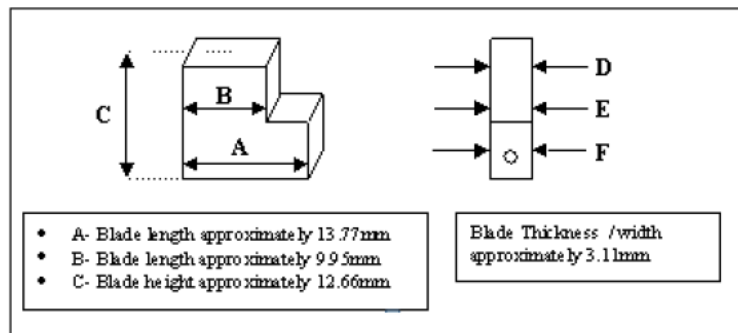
Dimensional Key for Transfer Pump Blade Measurements
